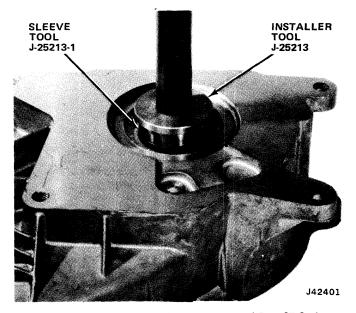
Installing Drive Sprocket Front and Rear Oil Seals
